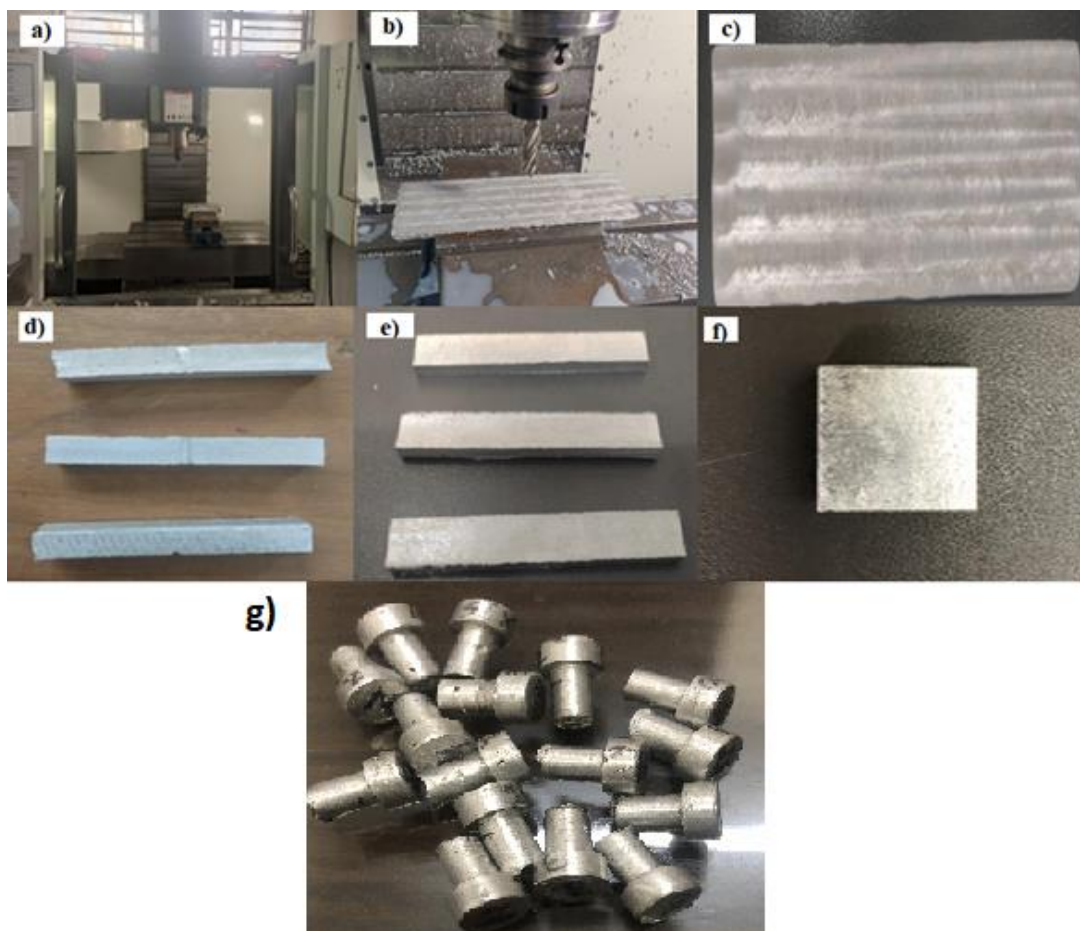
(a) CNC machine set up, (b) End Mill cutter, (c) Finished Al composite, (d) Impact (Charpy), (e) Flexural, (f) Hardness and Electrical Conductivity, (g) Cylindrical Pin
